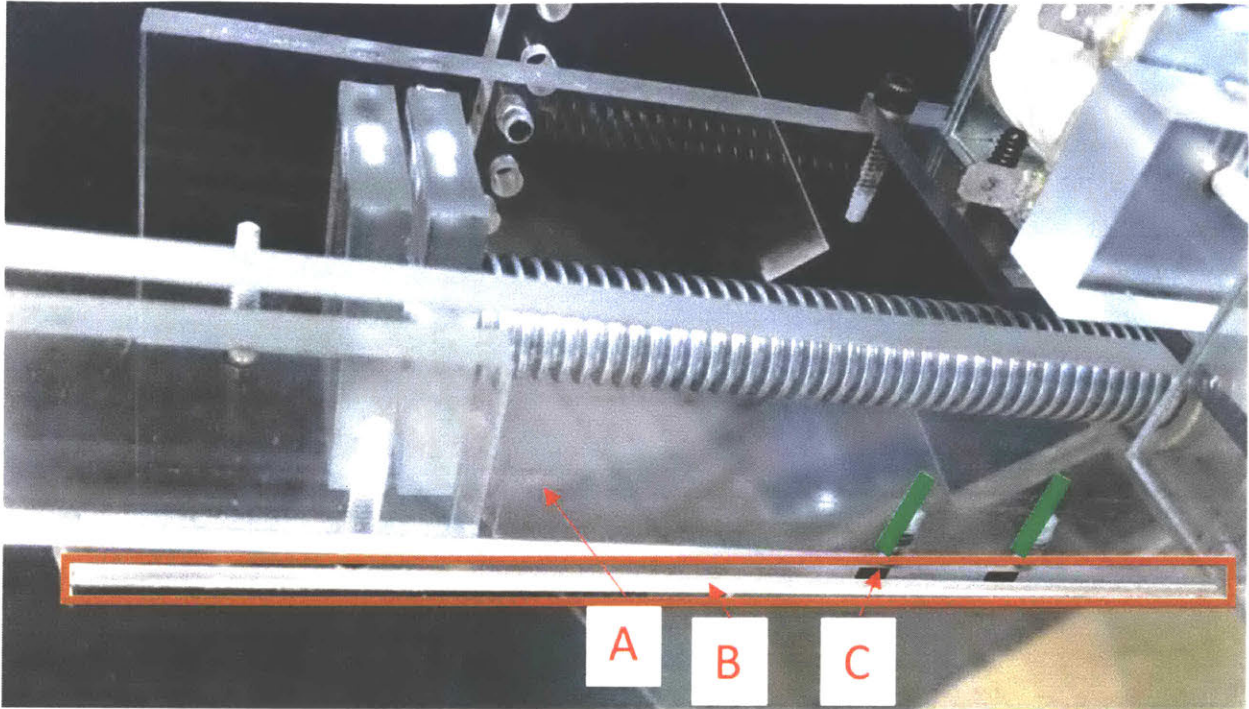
Tray slider sitting on top of guide grooves. A) Tray slider. B) Guide groove C) Tray slider set screw. Note: The orange box overlays the groove guide and the green squares denote the location of the tray slider set screws.
